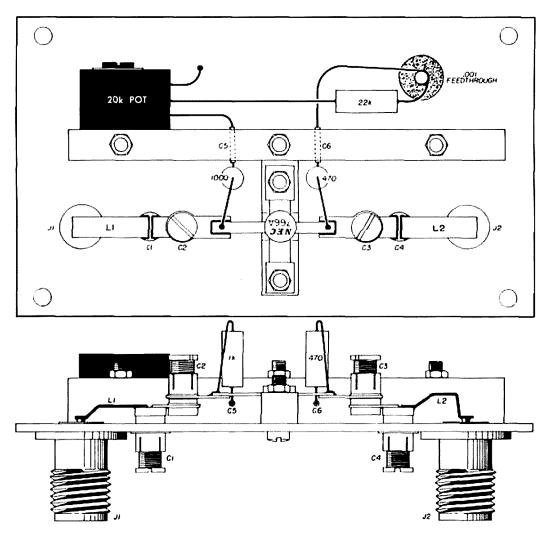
Layout of the 2304-MHz preamp. This drawing is twice actual size. Feed-through capacitors C5 and C6 consist of Teflon-covered wire, fit snugly into hole in 1/8" chassis partition.
